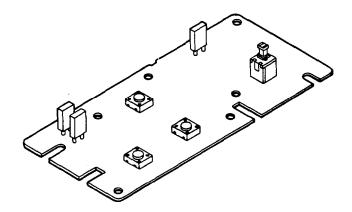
CO94 PNL Board Assembly (Control Panel Circuit Board)
